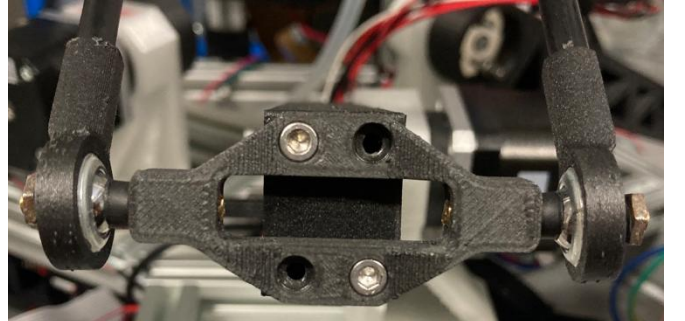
Assembly consisting of two spherical joints linked by a connector.
